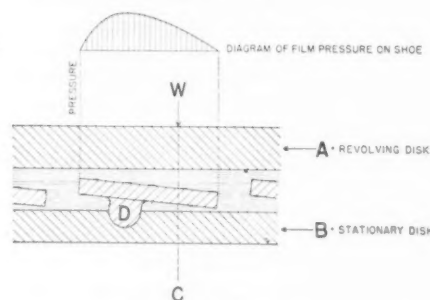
PRINCIPLE OF KINGSBURY OR MICHELL THRUST BEARING
